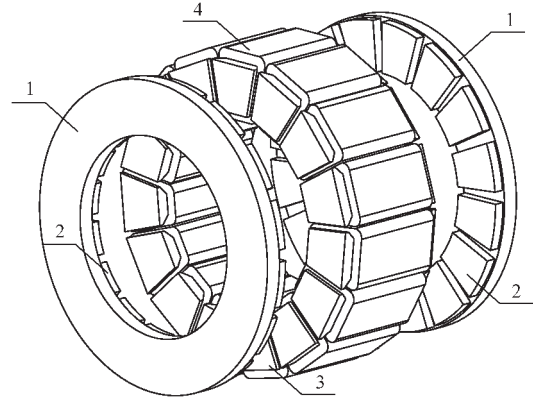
Double-rotor, single-stator, yokeless, and segmented-armature axial-flux PM machine. (1) Rotor disk, (2) permanent magnet, (3) stator-core element, and (4) winding.
